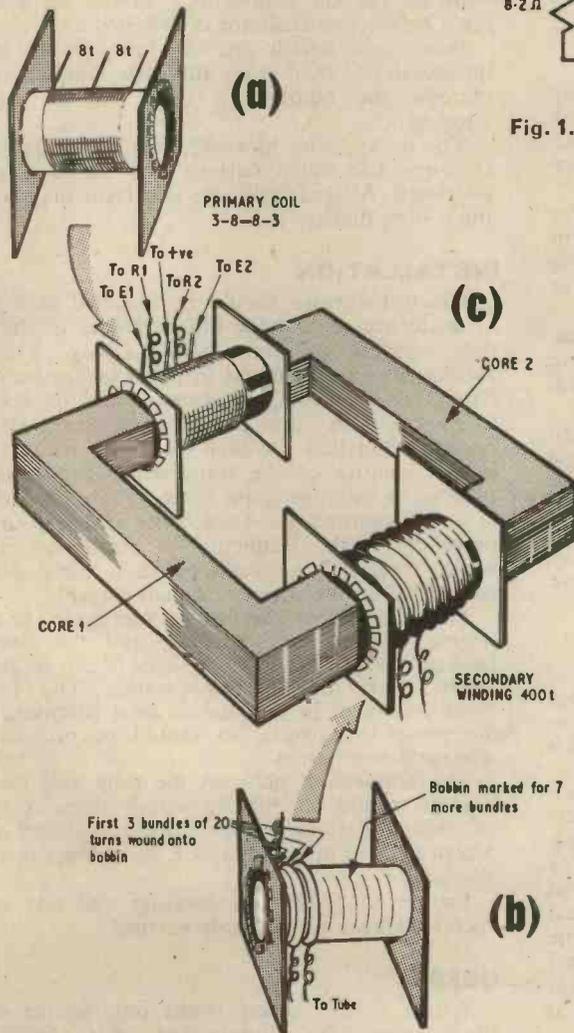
Transformer winding details. (a) The primary winding. (b) The secondary winding shown during construction. (c) The completed windings assembled on the C-cores
